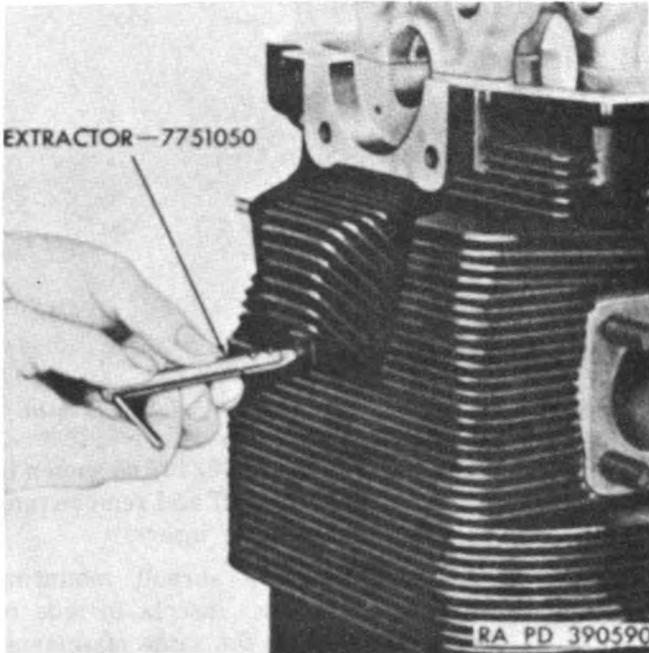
Removing shroud bolt Heli-coil threaded insert.
